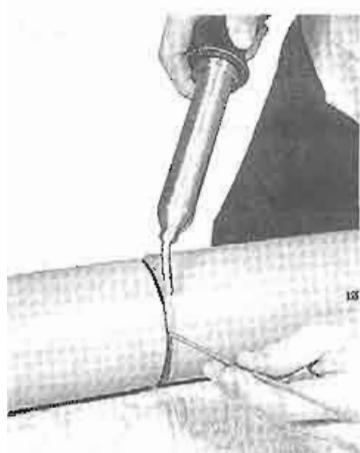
Using a hot-gas torch to make a weld in plastic pipe.
